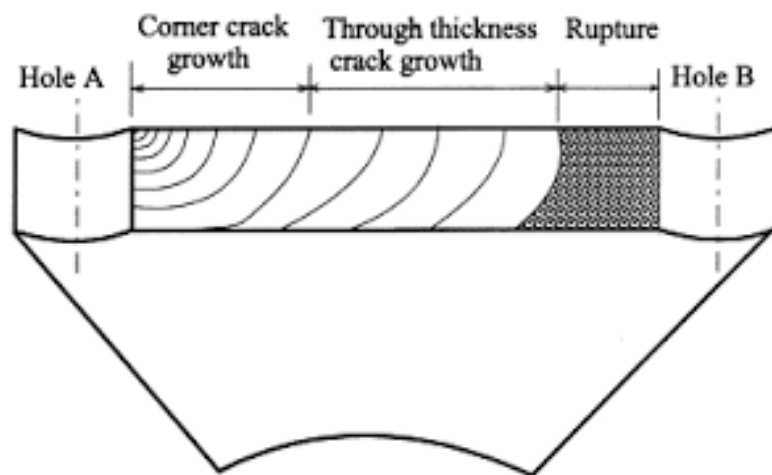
Fracture Surface between the Hole A and the Hole B in Broken Disc.
